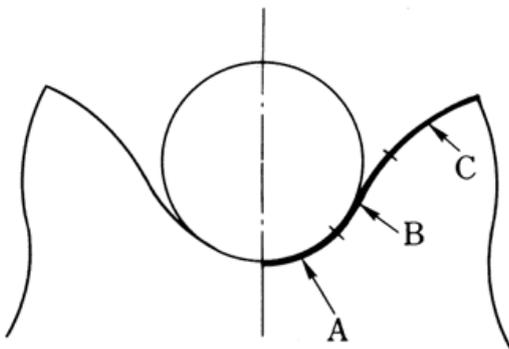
Sprocket Tooth shape and positions of Engagement
